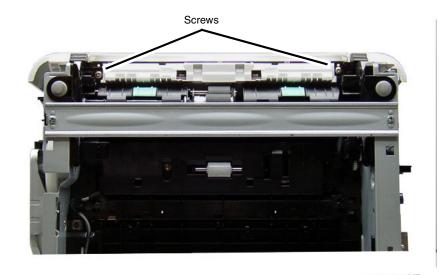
Manual Paper Tray Bottom Screws (Bottom View)
